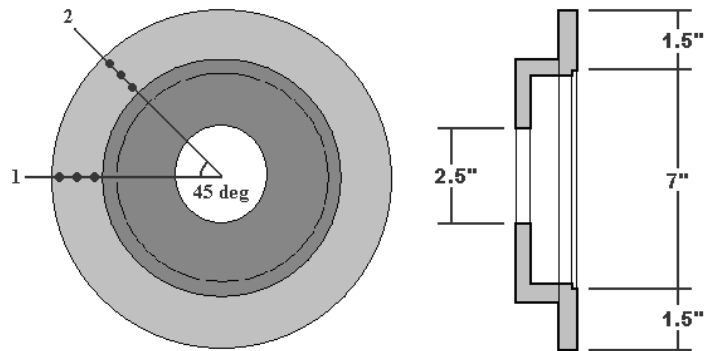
Dimensions and Measurement Locations of Brake Rotor Casting
